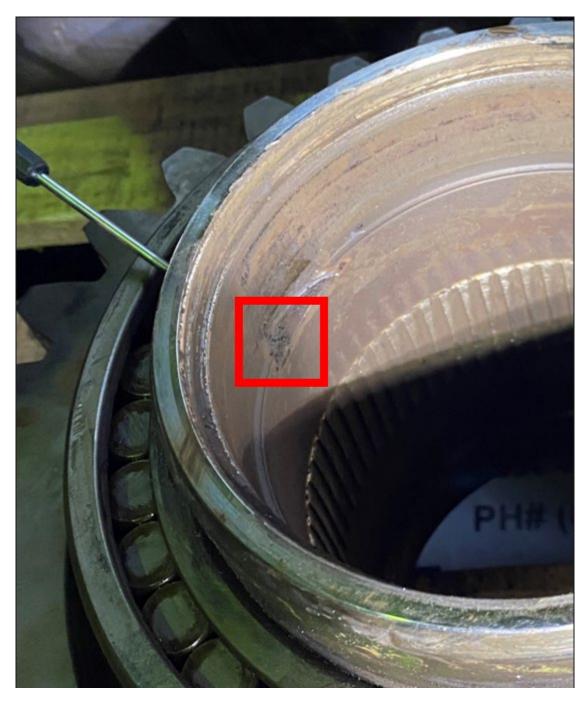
Step-drive main-shaft drive gear, red box showing location of plugged oil passage.
